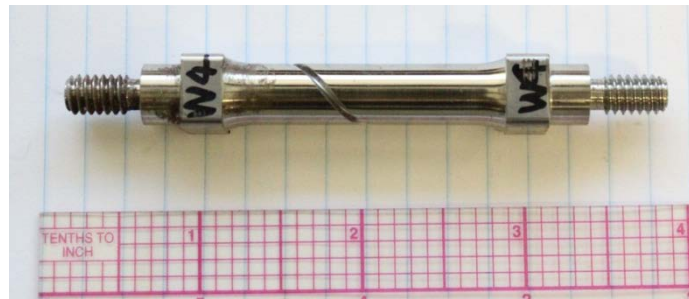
The fatigue precracked SNTT welded material sample W4.
